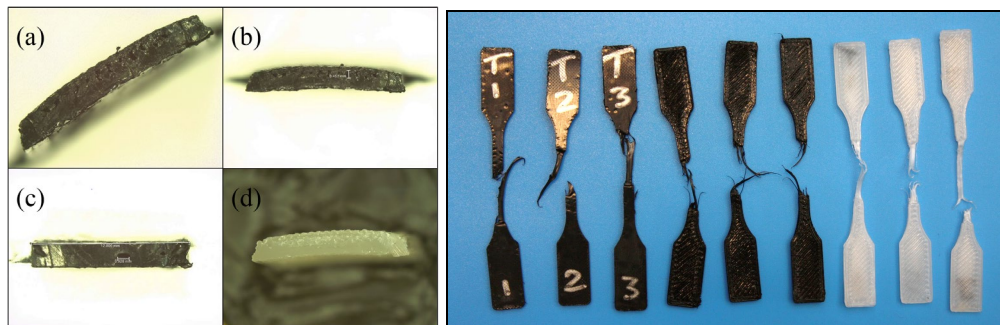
Morphological images of fracture planes of (a) & (b) 3D printed composite; (c) compression moulded composite; (d) 3D printed LLDPE and (e) post tensile test specimens showing the ductile failure after necking
